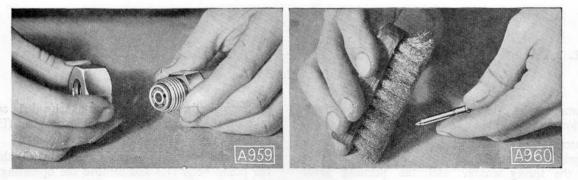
Nozzle inserted in adaptor for washing. Fig. 80. Brass wire brush for cleaning nozzle valve.
